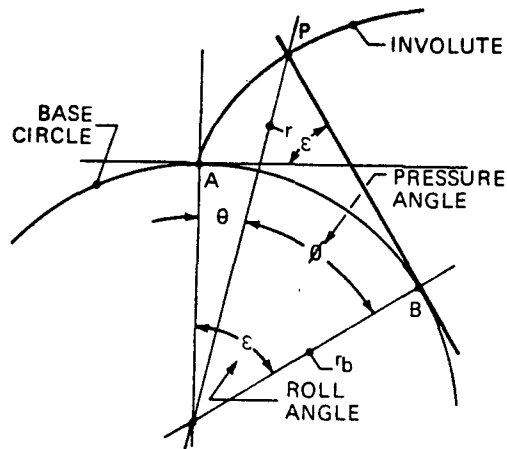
Geometric Parameters Used for Shaper Cutter Equation (1)
